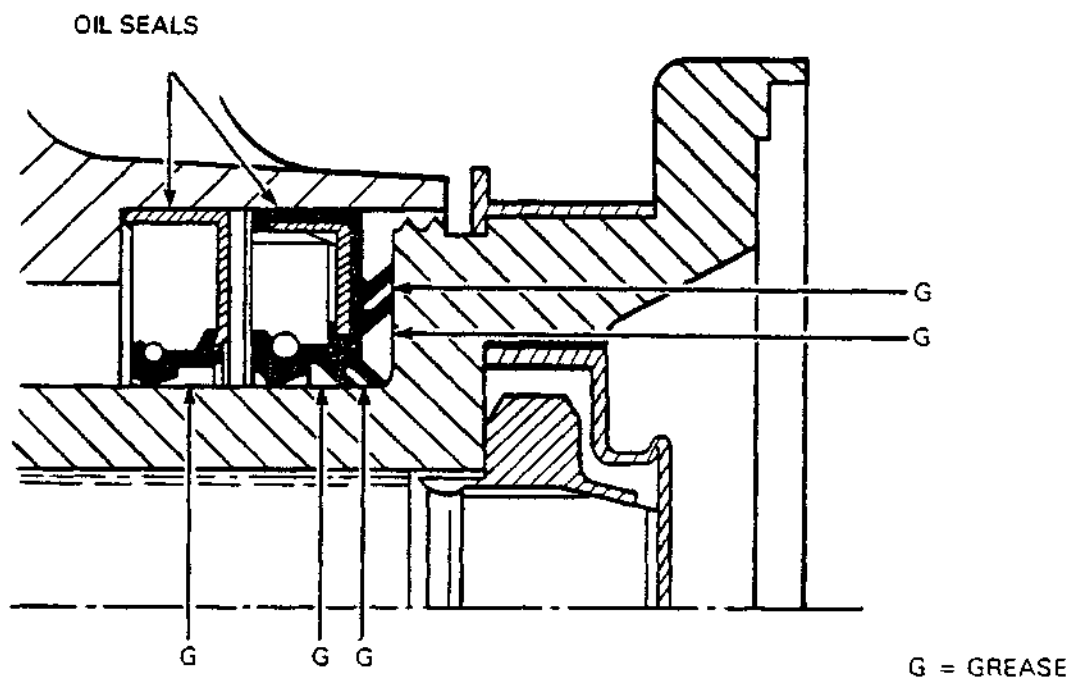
Grease Points for Propeller Shaft Drive Flange Oil Seals
